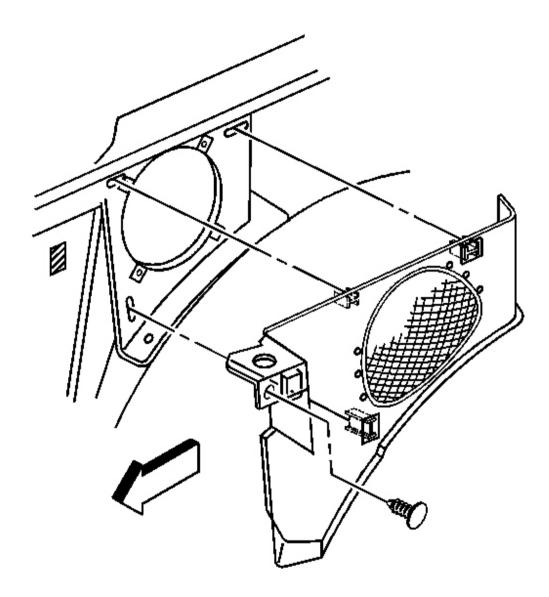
Rear Compartment Right Side Trim Panel Courtesy of GENERAL MOTORS CORP.
